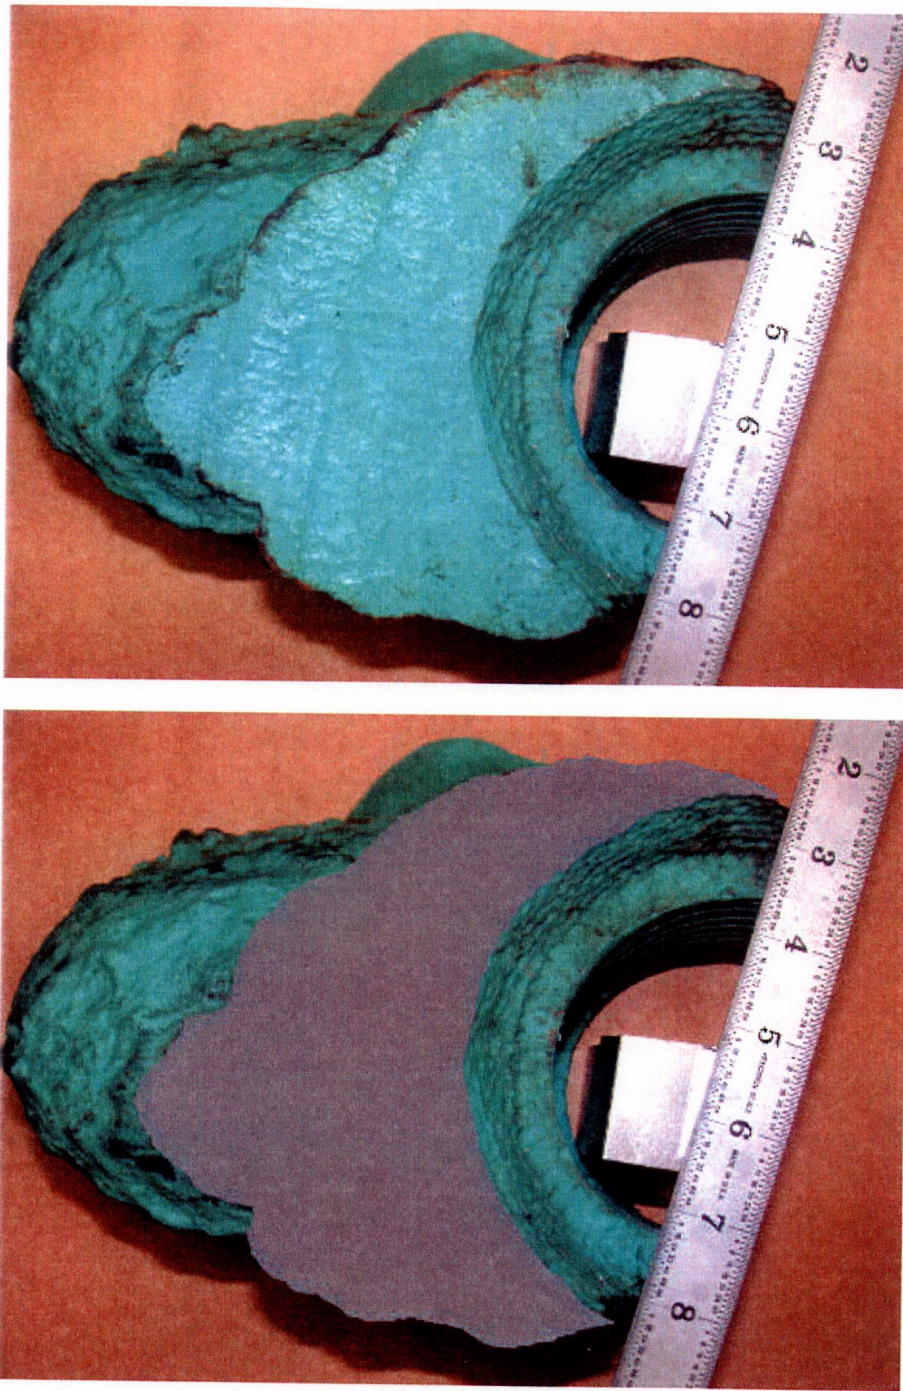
Photographs showing exposed cladding surface. The gray mask in the lower photograph was used to calculate the exposed cladding surface area.
